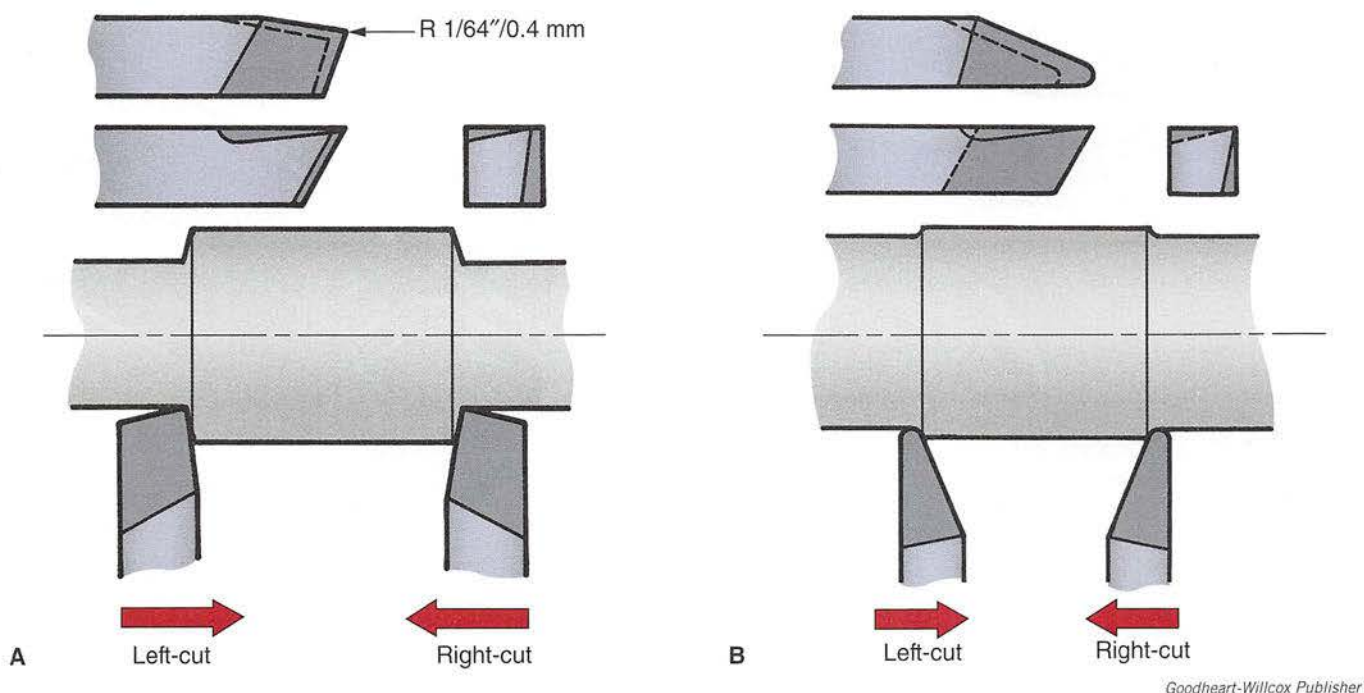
Lathe tools. A—The roughing tool is used for rapid material removal. B—The finishing tool produces a smooth surface.
